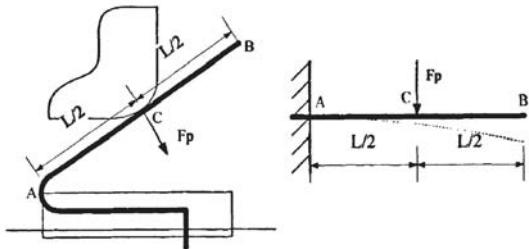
The contact spring strip of common RJ45 socket and its equivalent mechanical model
